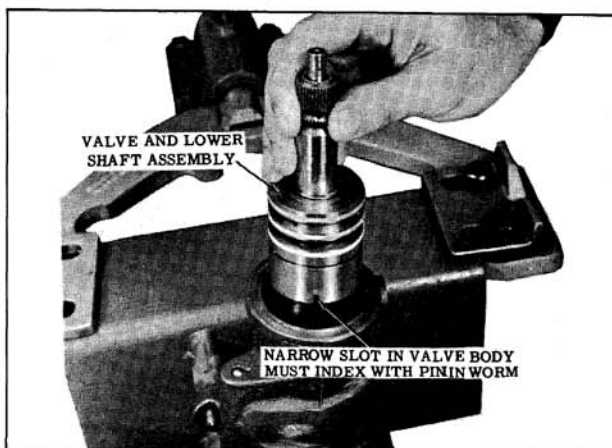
Installing Valve and Lower Shaft Assembly
